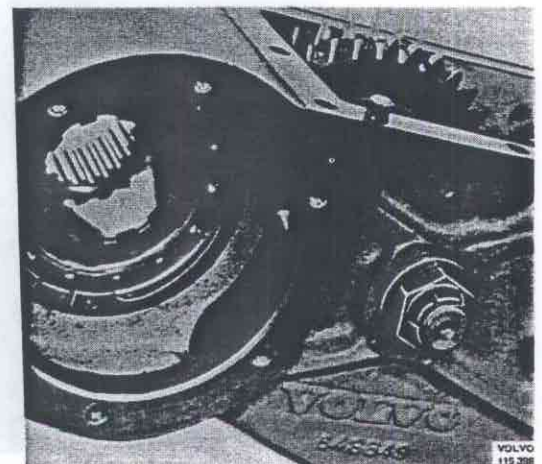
Circlip cluster gear, nut, intermediate gear
